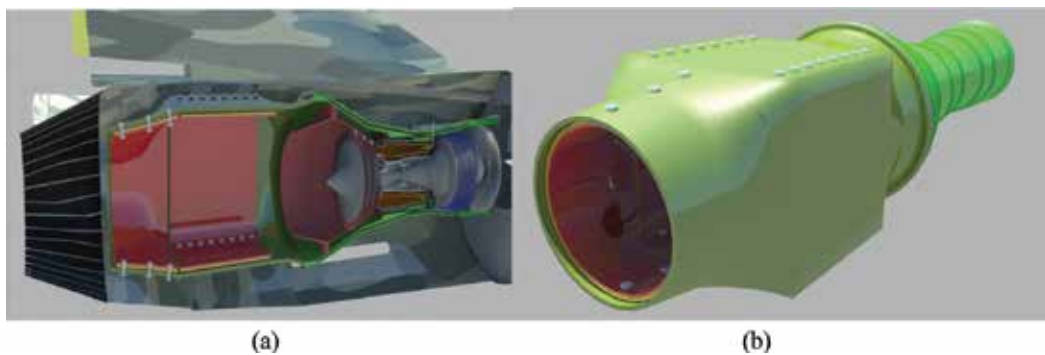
(a) 3D section of jet fighter engine showing modified engine. (b) 3D view of jet fighter modified engine.
